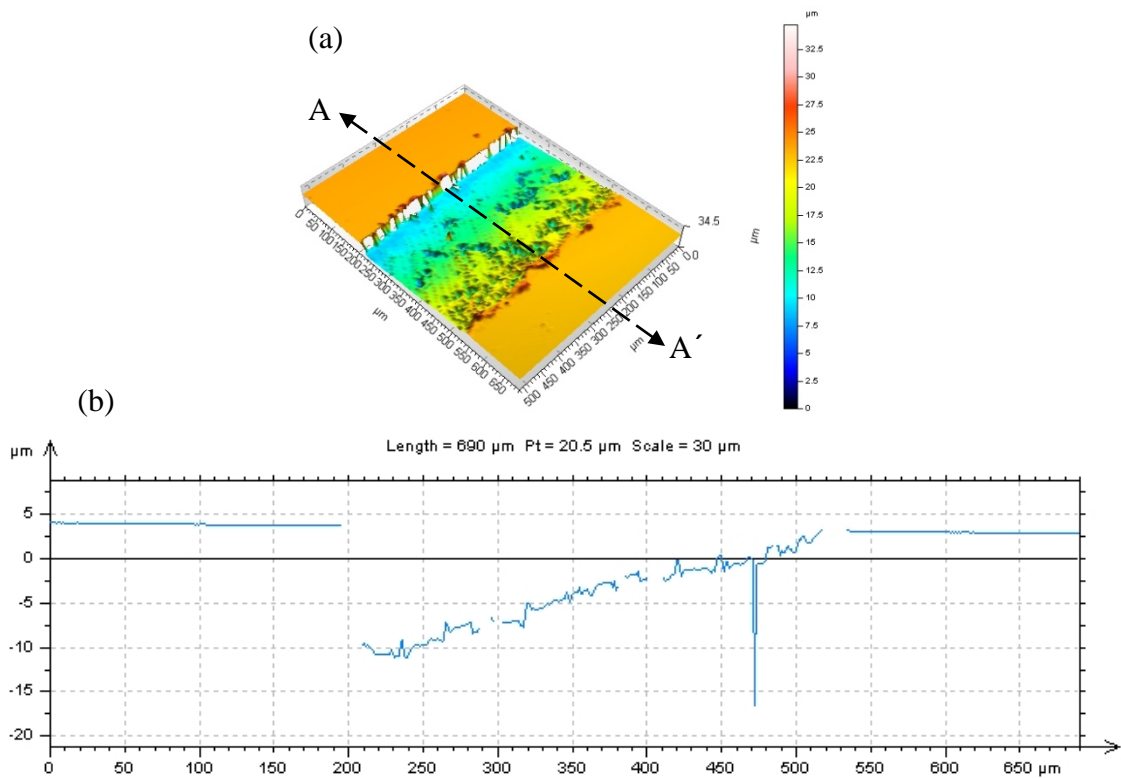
Machined groove with triangular mask (a) Surface map, (b) Profile A-A'
